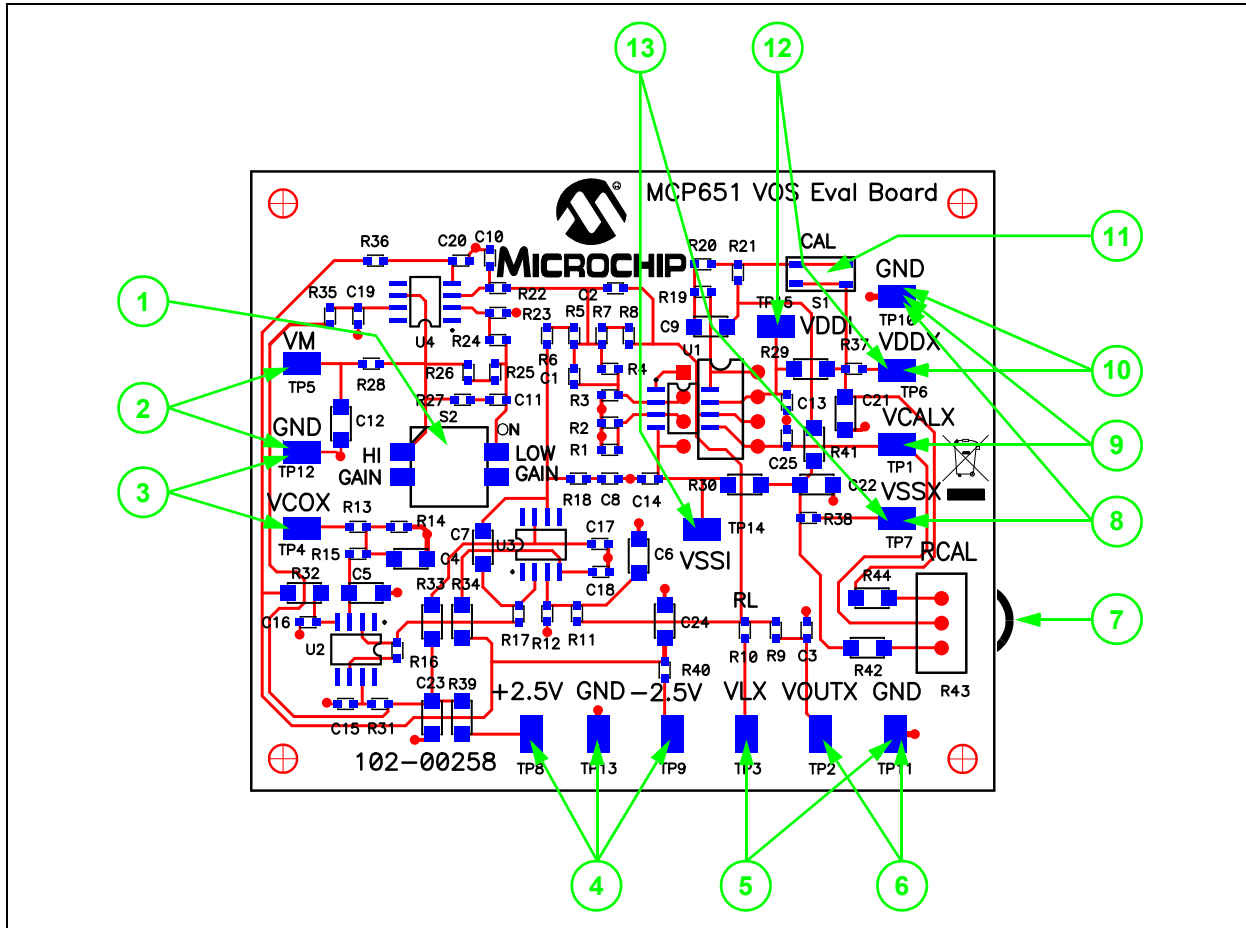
Lab Equipment Connections and Configuration Switches for the MCP651 Input Offset Evaluation Board.
